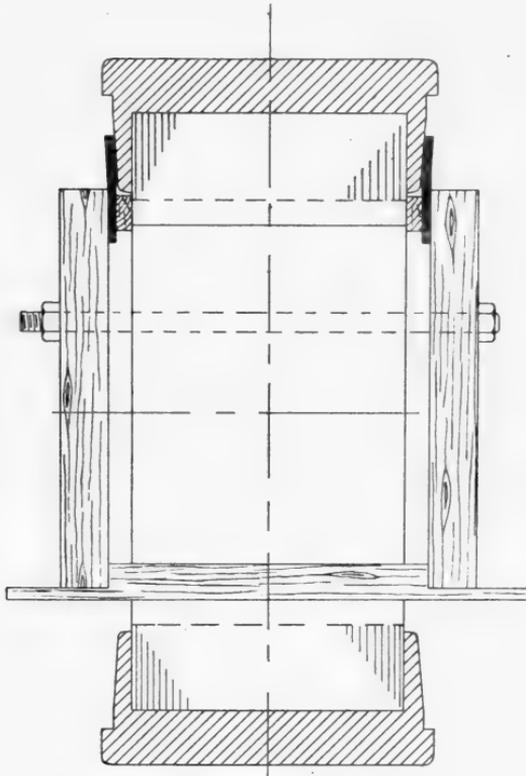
Arrangement of Winding Blocks for Hand Winding.
